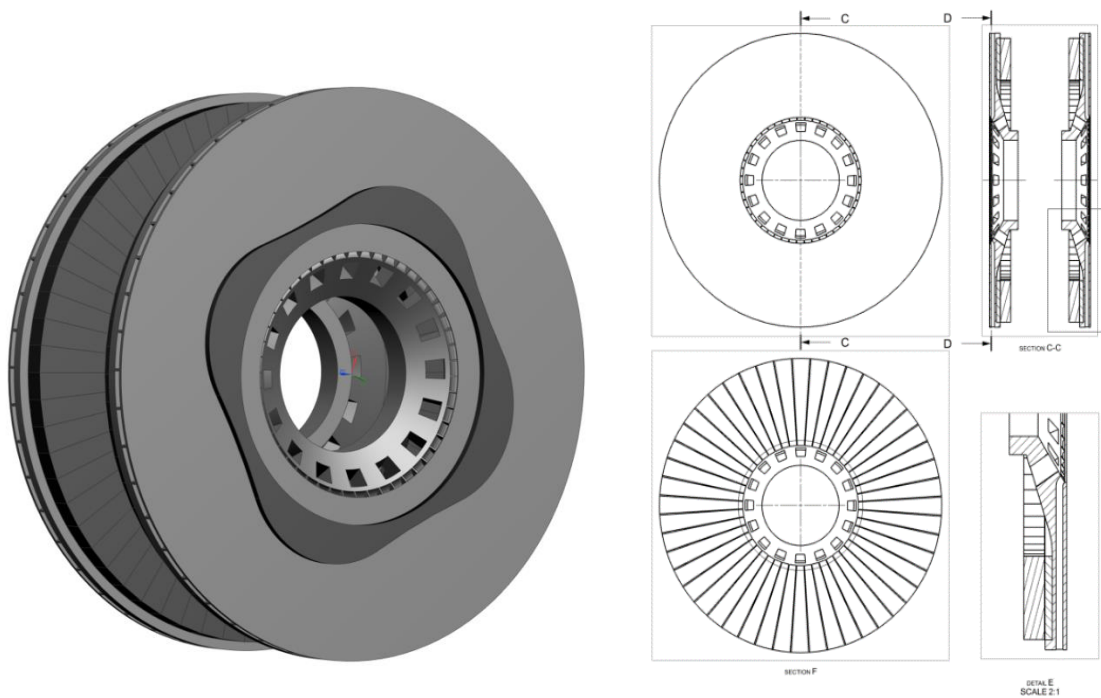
R1 rotor design, Back plated rotor with radial blades.
